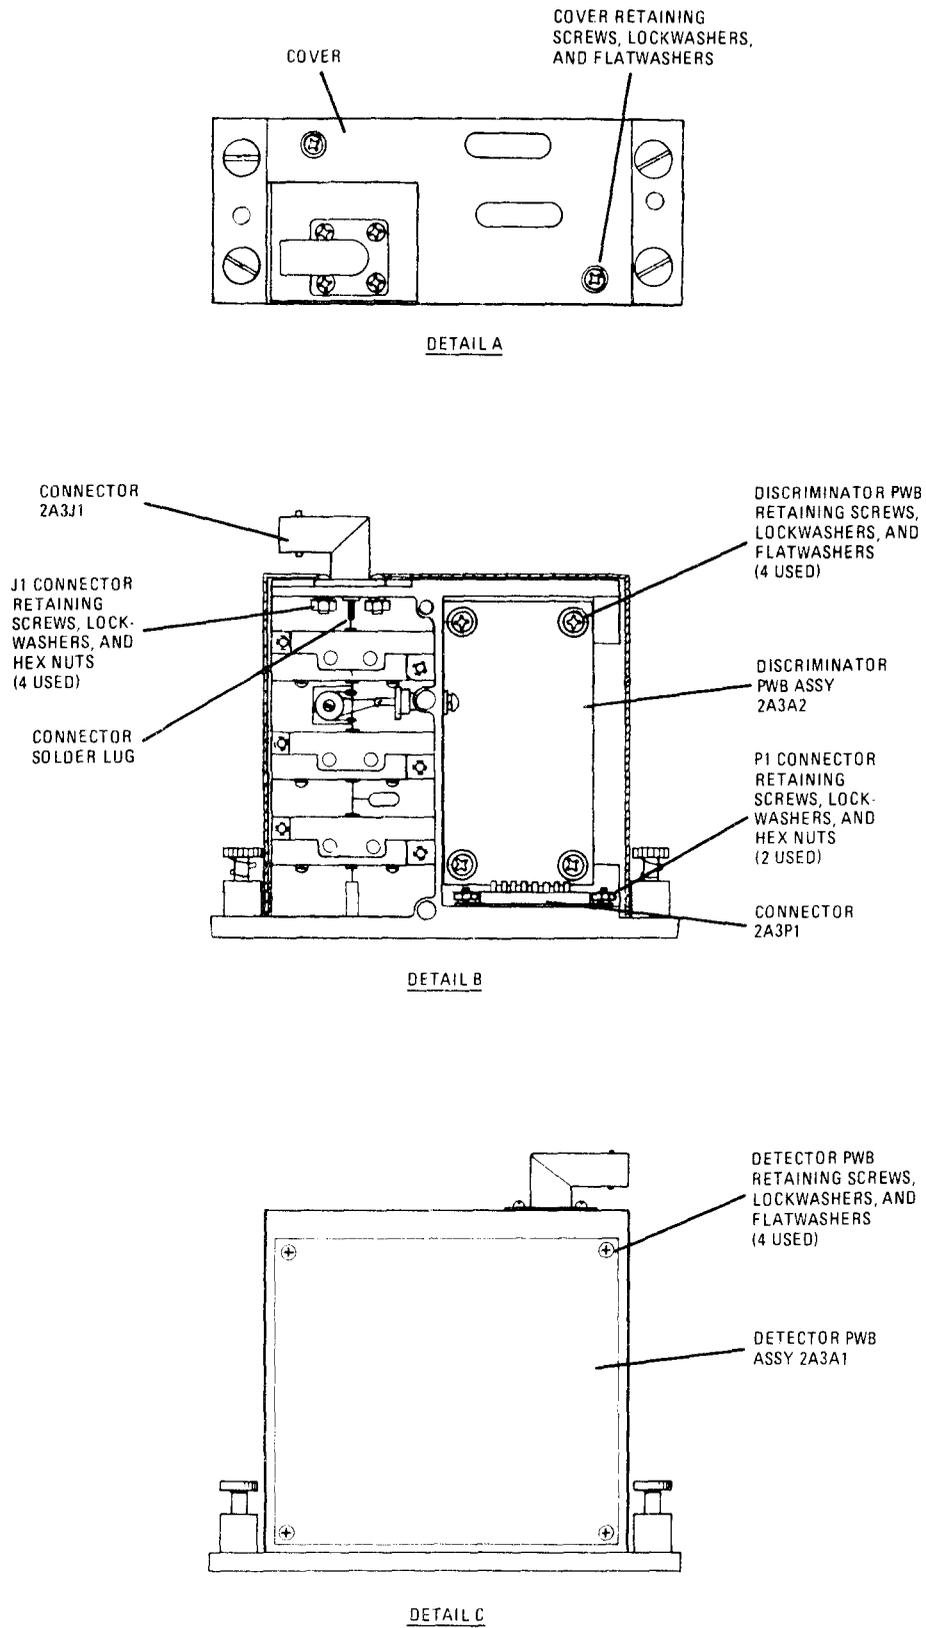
Loading-Phasing Discriminator Assembly 2A3 - Disassembly Details
